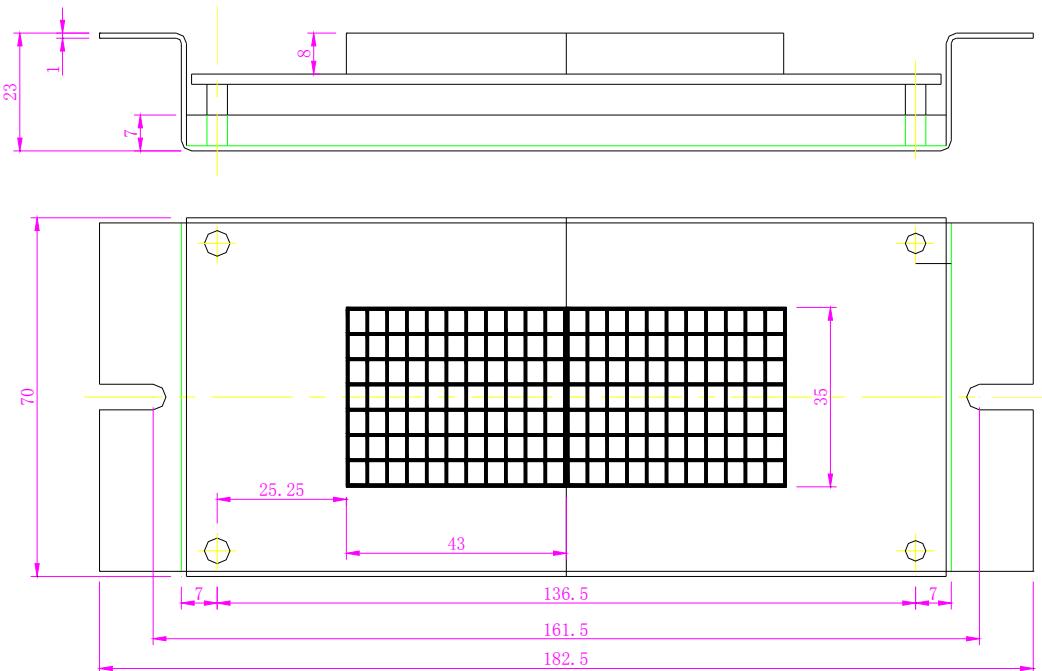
Mounting Dimensions of SM-04-HSC
